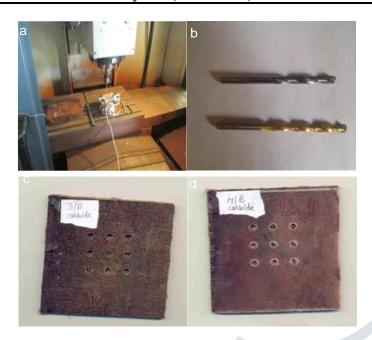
a) Specimen set up on drilling TI- NI coated HSS drill bit. B) Carbide drill bit and c) Drilled specimen of material 1, d) Drilled specimen of material 2.
